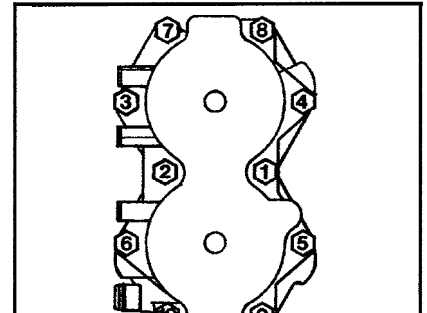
Typical cylinder head torque sequence-cross-flow motor shown
